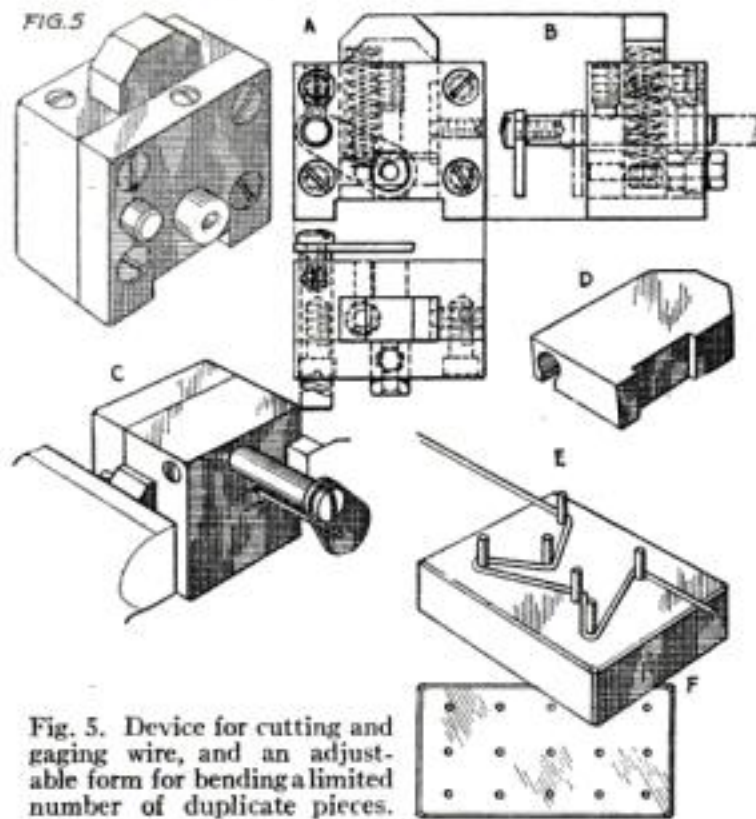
Device for cutting and gaging wire, and an adjustable form for bending a limited number of duplicate pieces.
